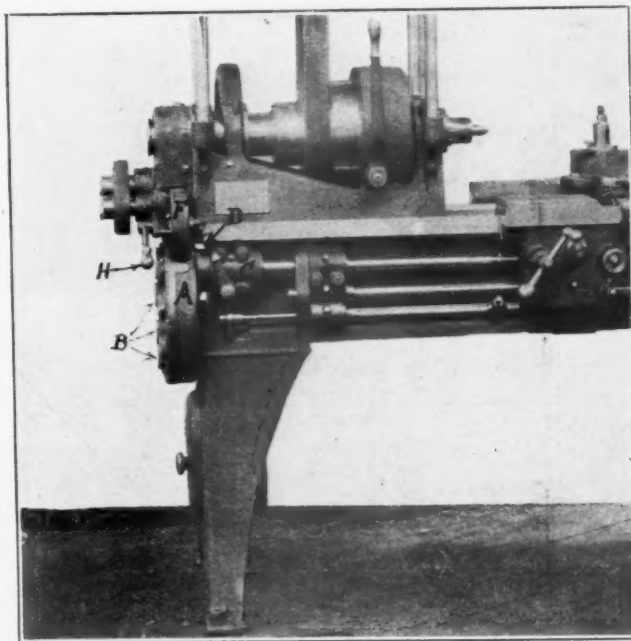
IDEAL LATHE, SPRINGFIELD MACHINE TOOL COMPANY, SHOWING CHANGE-GEAR BOX.
